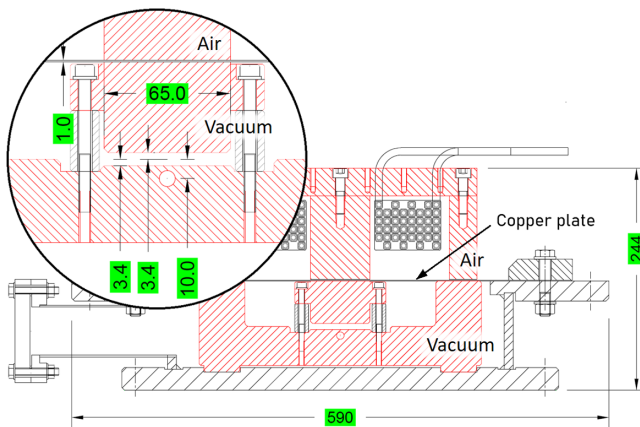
Cross section of the septum magnet, with enlargement of the gap region. The upper half of the iron core with the coil winding is in air, and the lower half with beam apertures is in vacuum, with a 1-mm copper sheet as vacuum sealing. The aluminum support block for the thin copper sealing plate is not shown.
